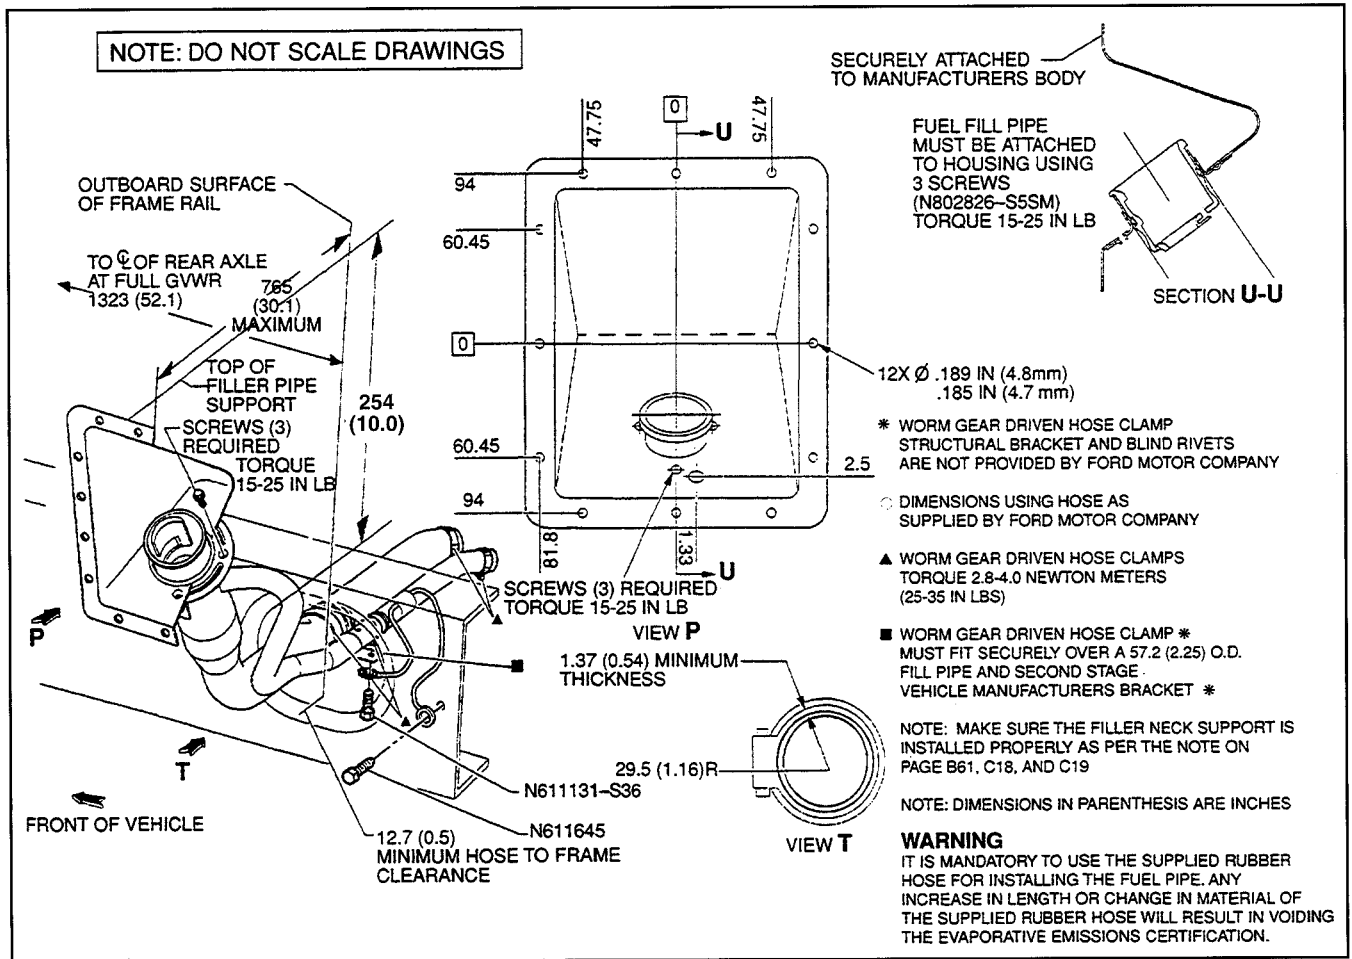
FIGURE B F-SUPER DUTY CLASS A MOTOR HOME CHASSIS (F53) FUEL FILLER PIPE INSTALLATION
